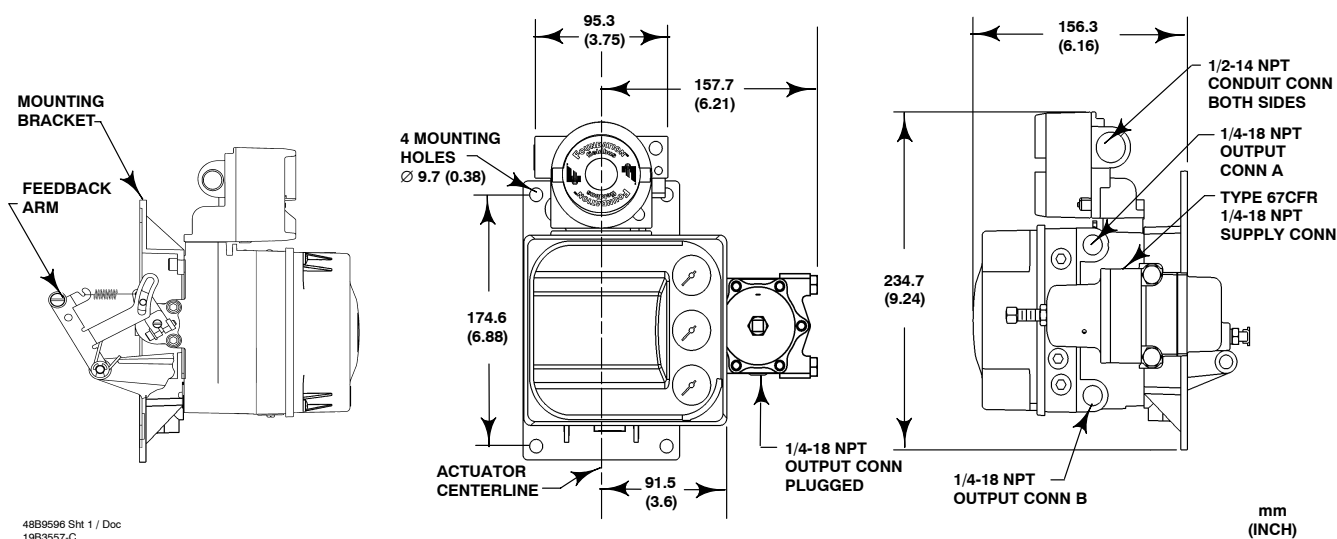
Dimensions for Type DVC6020f Digital Valve Controller with Integrally Mounted Filter Regulator
